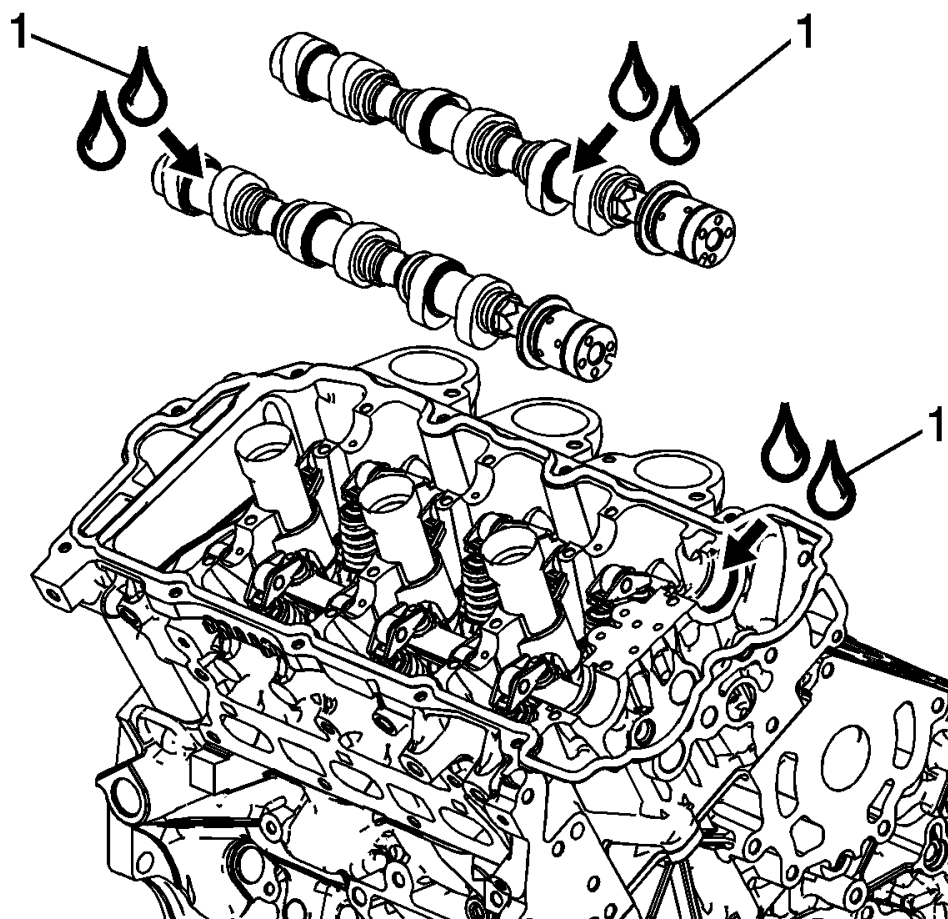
Right Cylinder Head Camshaft Lubrication Points
